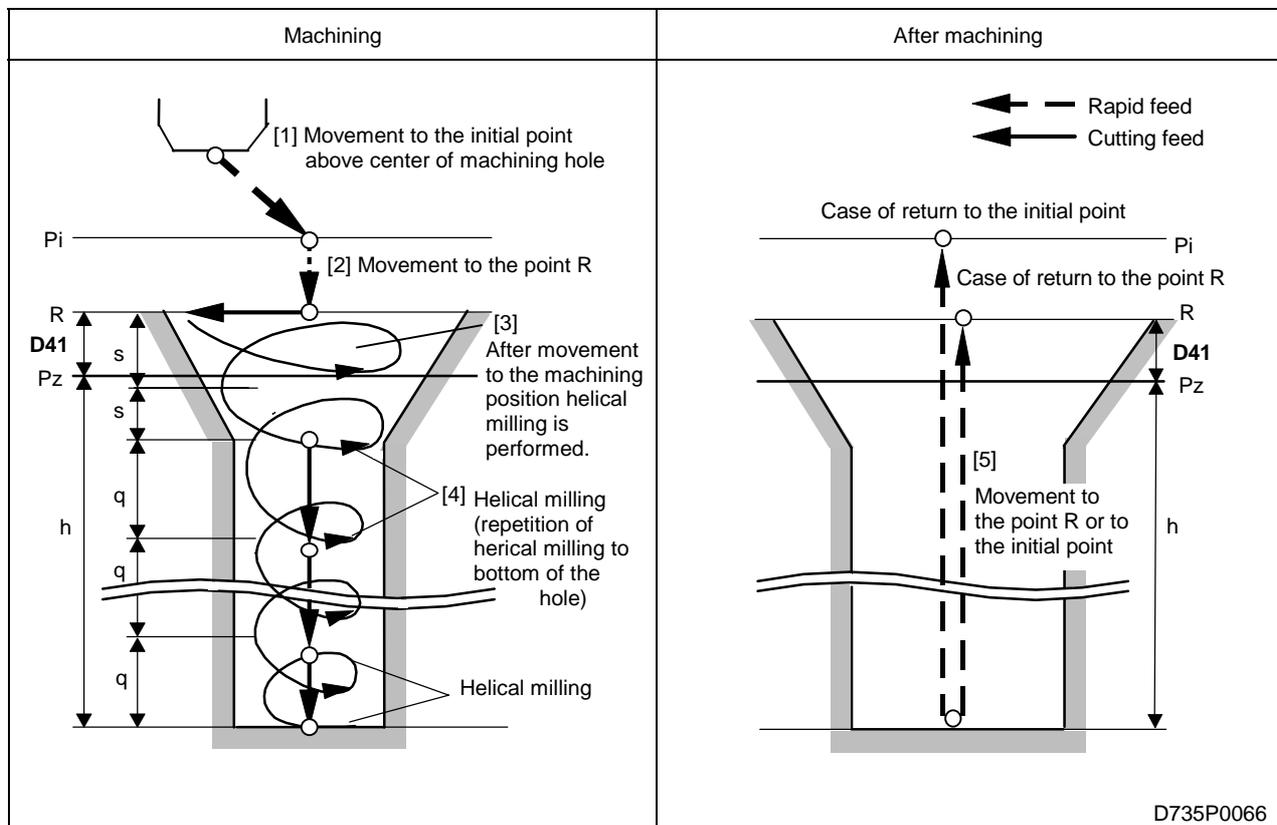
Circular milling-B (case of shortening in chamfering)
